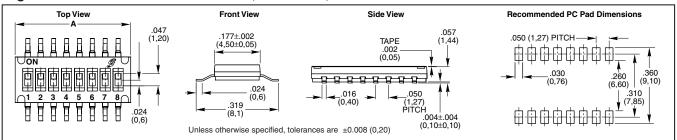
Series 97R DIMENSIONS in inches (and millimeters)
